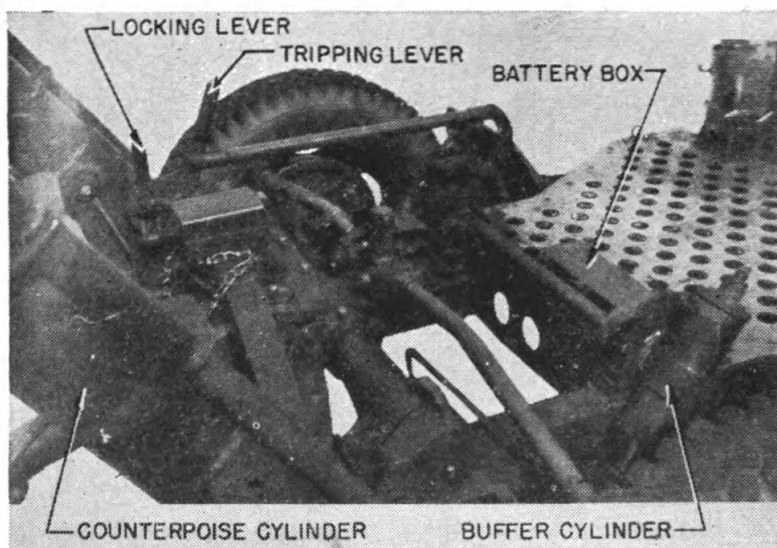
Arrangement of front wheels of mount, 37-mm antiaircraft gun.
